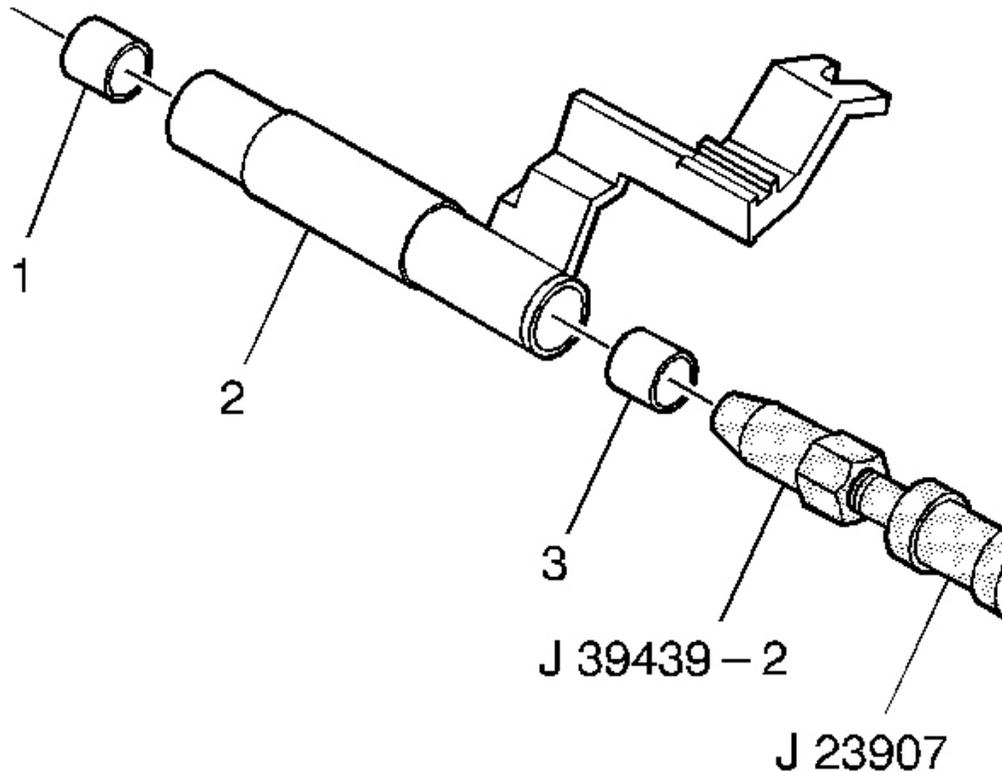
Removing 5Th/6Th Shift Shaft Lever Bushings From 5Th/6Th Shift Lever Using J 23907 And The J 39439-2
